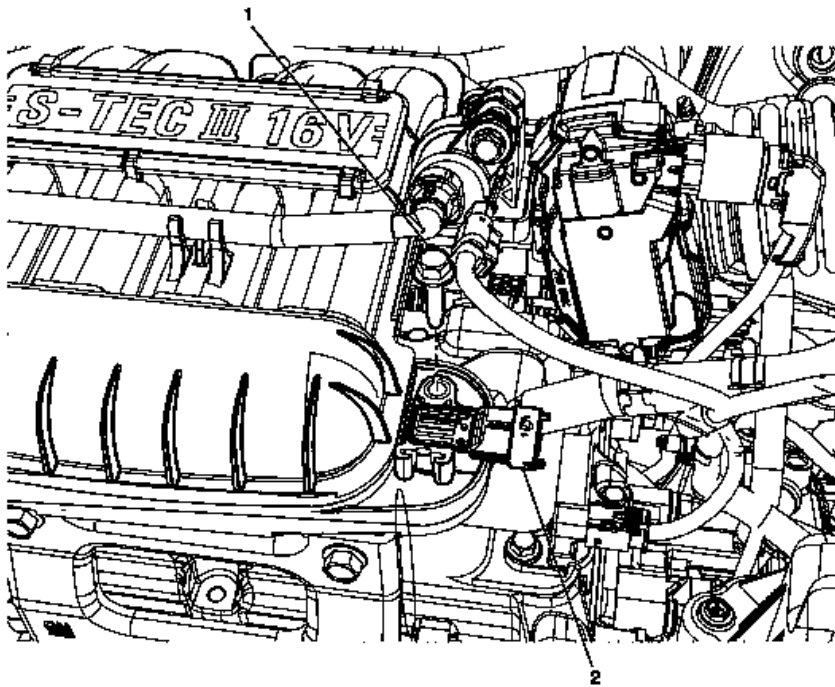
Manifold Absolute Pressure Sensor (LFM)
